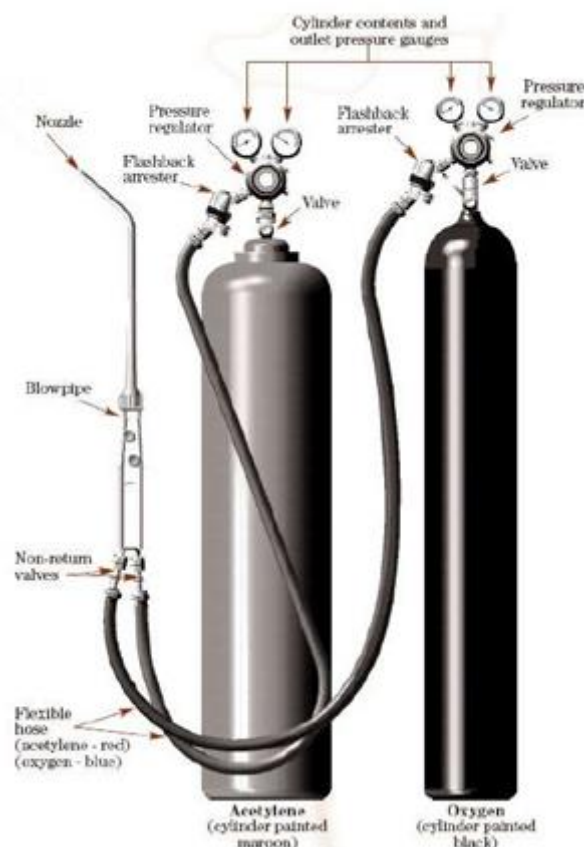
Oxy-acetylene welding unit with flashback arrestors. Source: www.metals4u.co.uk/how-to-oxy-acetylene-weld.asp
